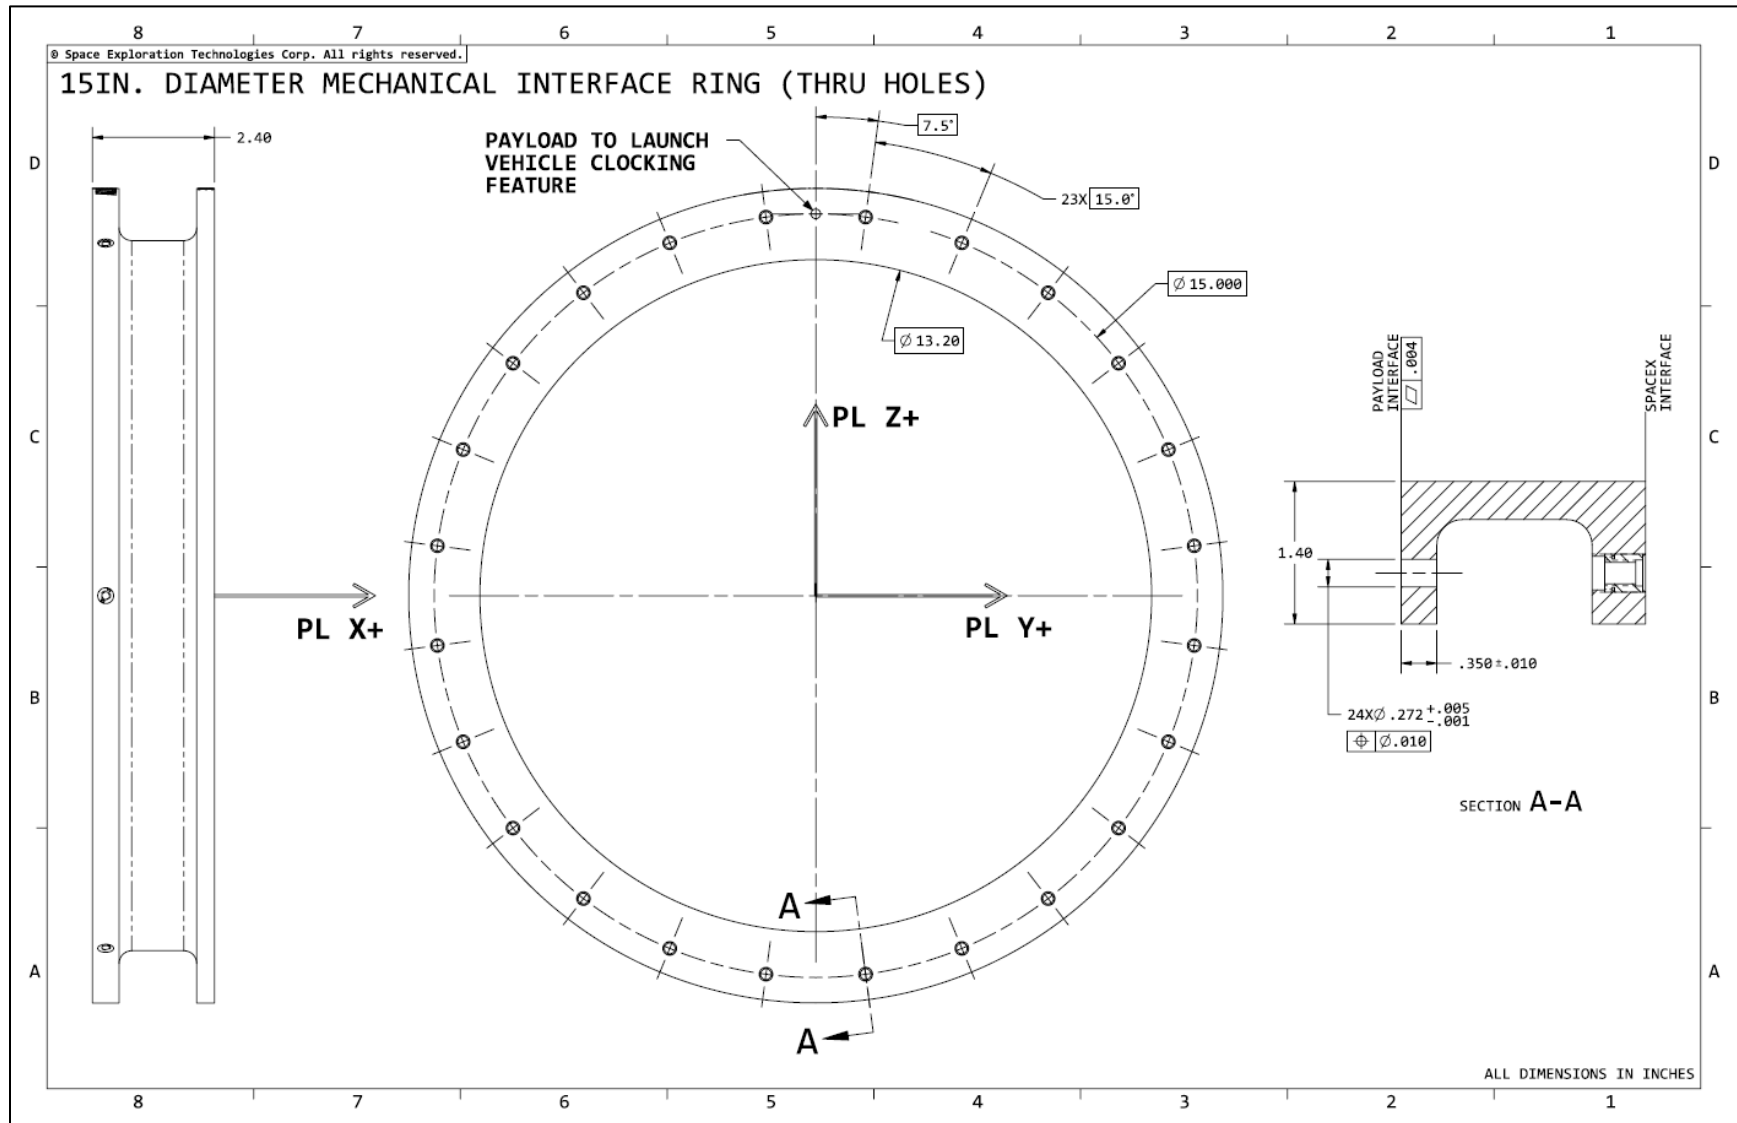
15" Diameter Mechanical Interface Ring (Thru-Holes)
